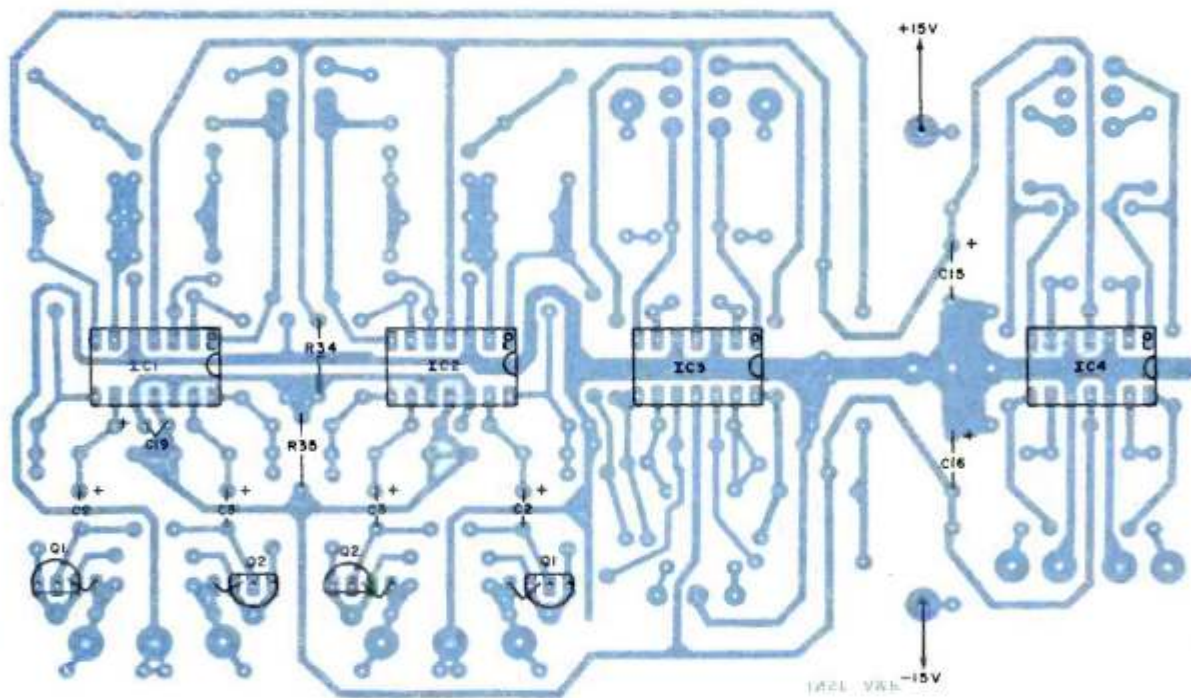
Component placement guide reflects changes with respect to Fig. 8 that must be made for assembly of a moving-coil phono preamp.
